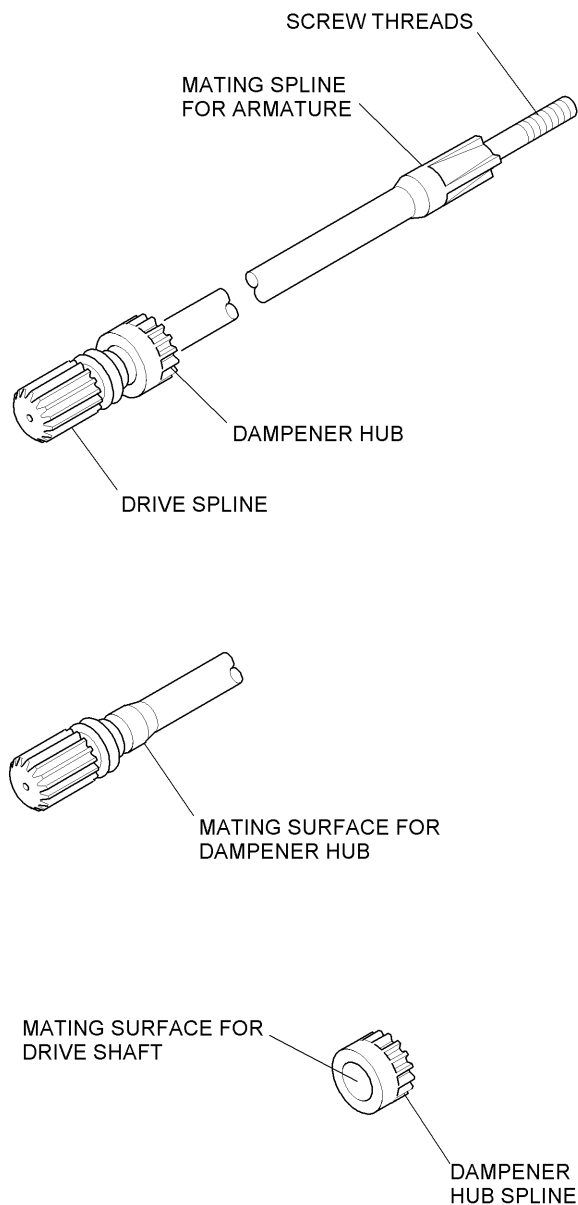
Inspecting Drive Shaft and Dampener Hub
